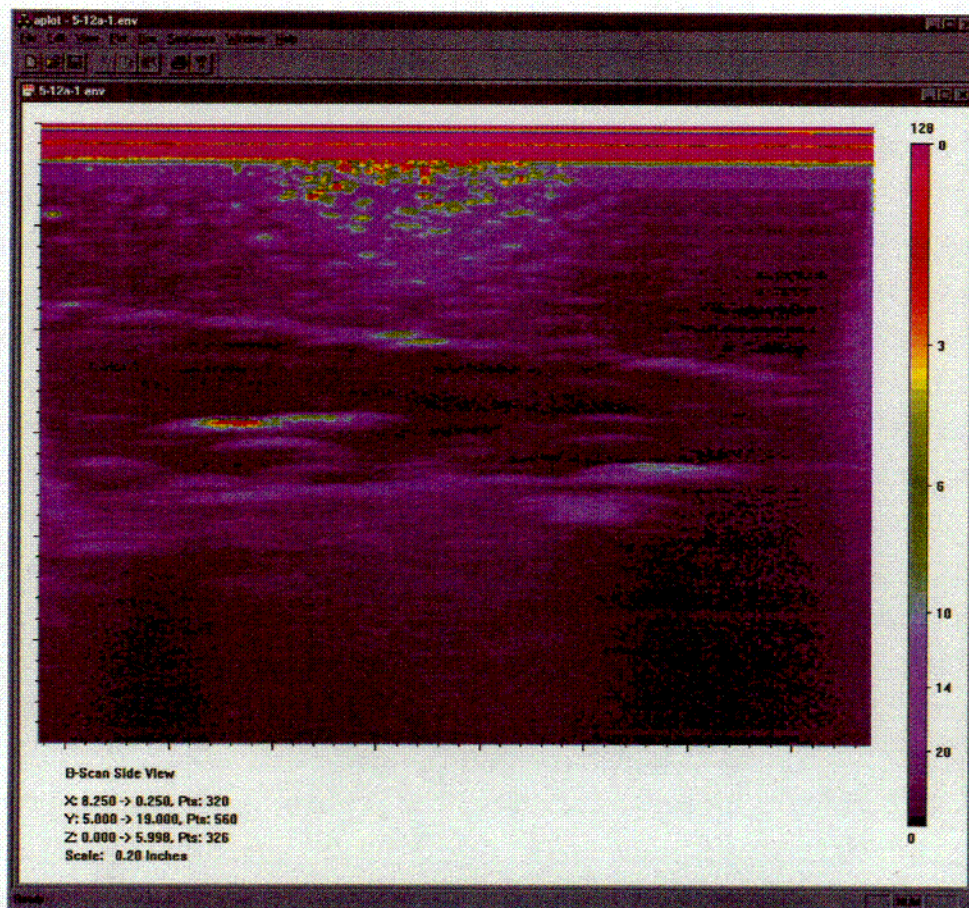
UT Image Showing Weld Profile with Weld Flaw Indication
